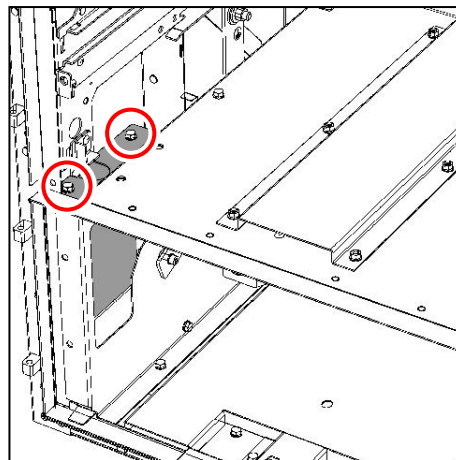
2 bolted joints on metal cover in switching-device compartment
